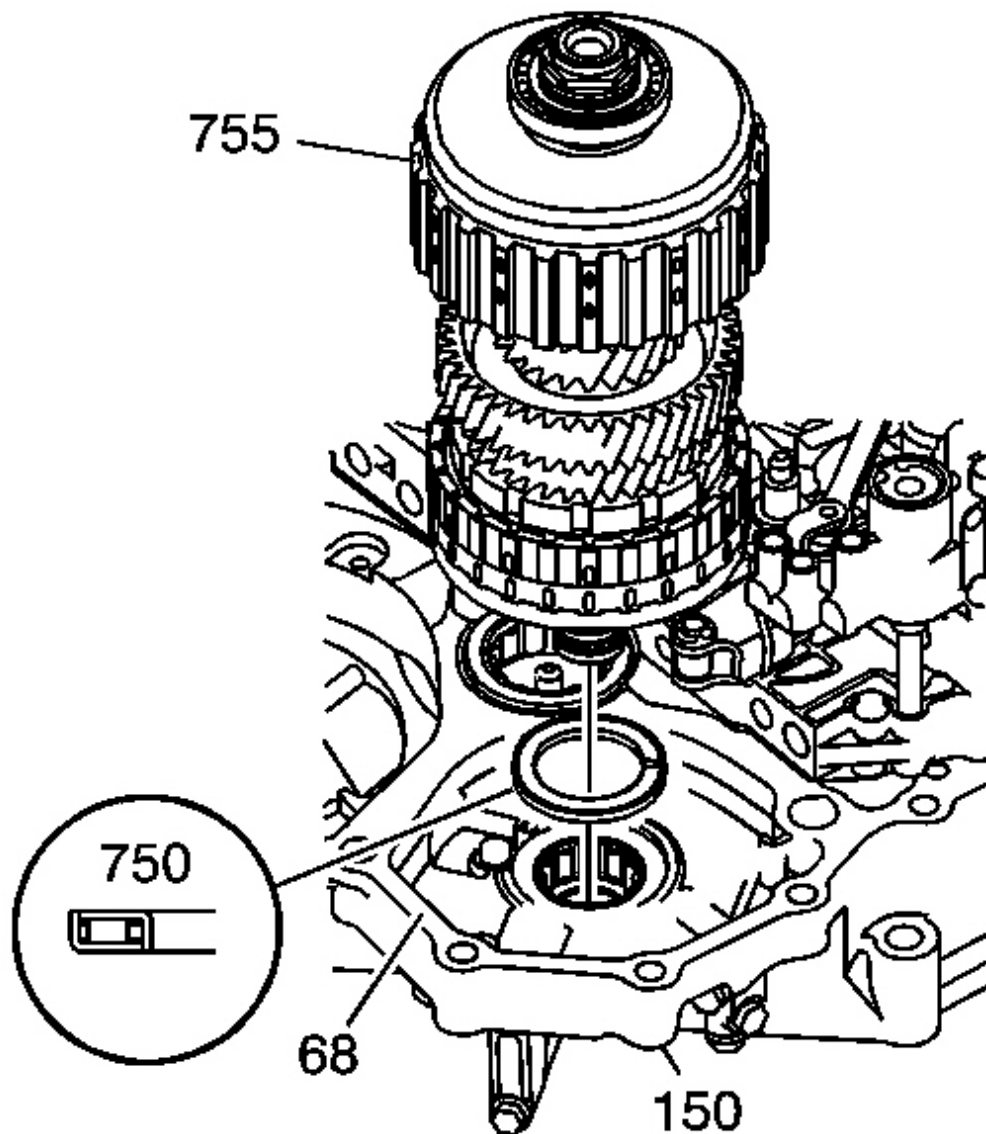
1st/2nd Clutch Shaft & Clutch Housing Thrust Bearing
